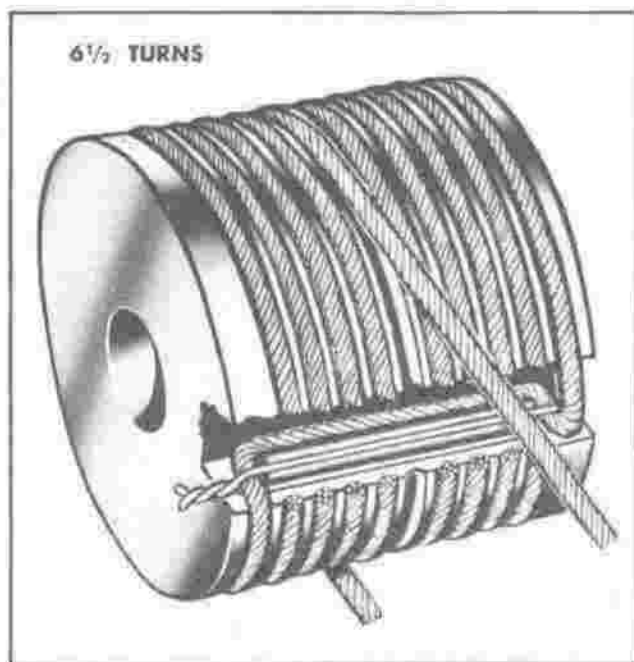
Elevator Tab Drum Rigging (Pedestal)
